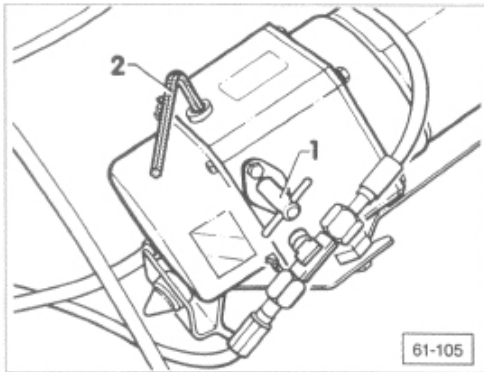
Detail view of hydraulic pump unit, with trim panel removed, showing thumb-screw (1) and $\frac{3}{16}$ in. hex wrench (2) used to remove filler plug and check hydraulic oil level.
